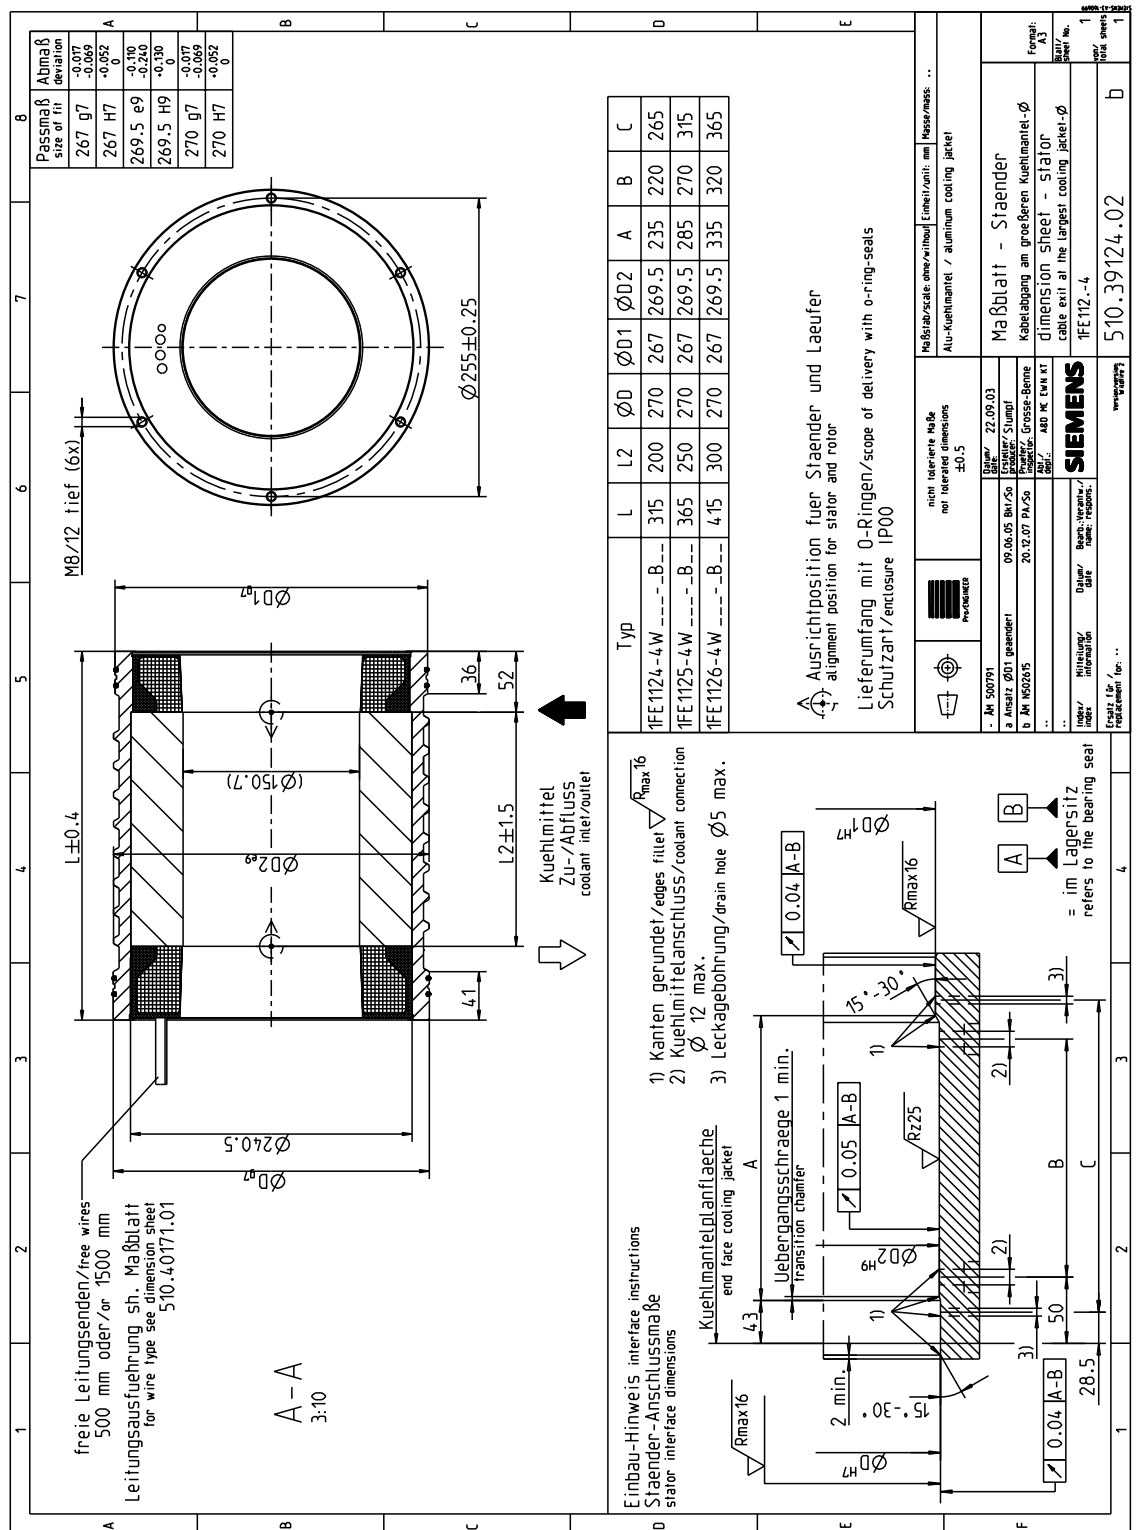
1FE112□-4, stator with cooling jacket, cable outlet at the larger cooling jacket diameter
